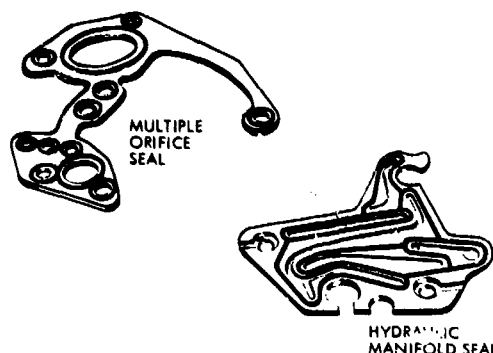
Typical Configurations Available with Molded Shape Gaskets
